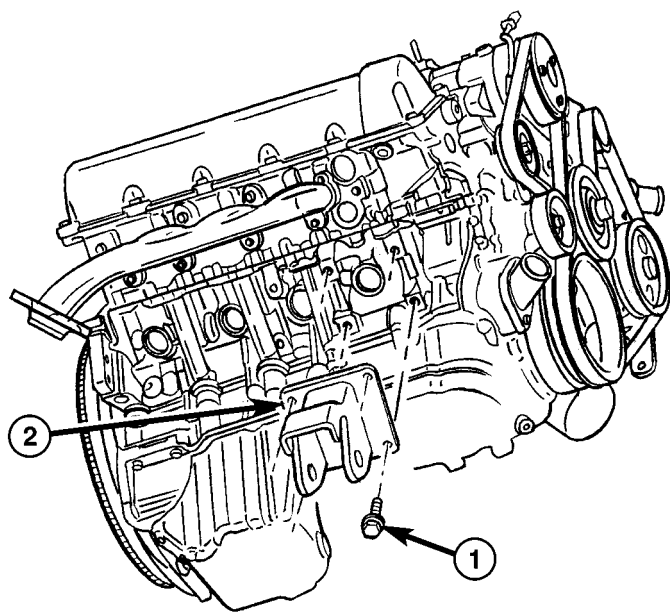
ENGINE INSULATOR MOUNTS 4X4
